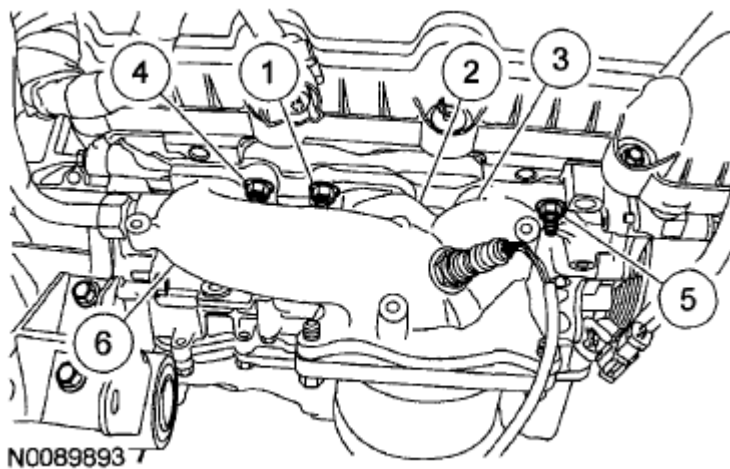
Identifying RH Exhaust Manifold And Nuts
